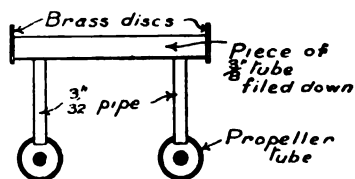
METHOD OF LUBRICATING PROPELLER SHAFTS.
